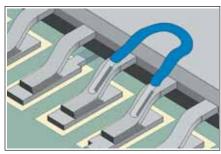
Acceptable* Wire looped and soldered to adjacent component leads.
